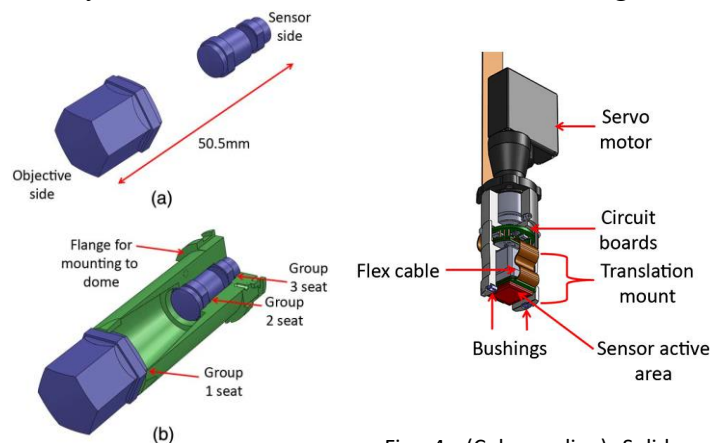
(a) Solid drawing of micro-optics for AWARE-2. (b) Solid drawing of micro-optics assembled into a cutout barrel.
